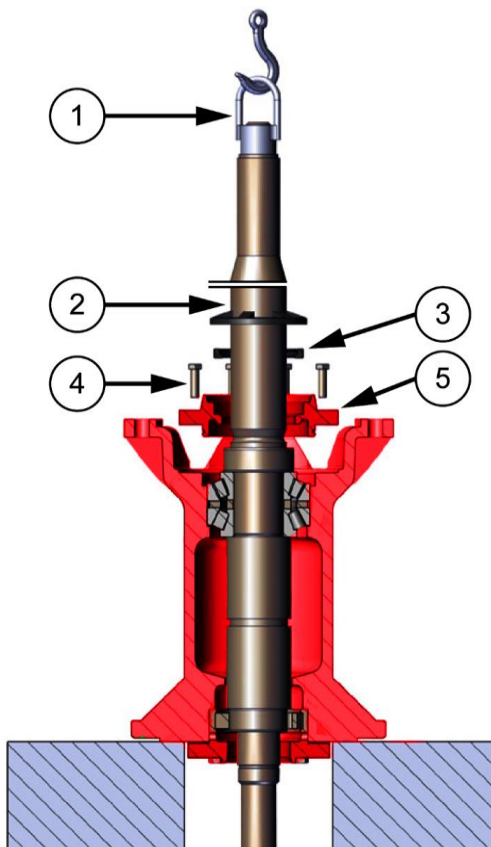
Fitting Shaft, Lower End Cover, Bearing Seal and Shaft Flinger to Bearing Housing.
